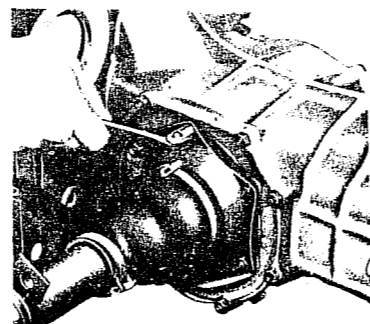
Removing the axle tube retainer. - Swing axle.
